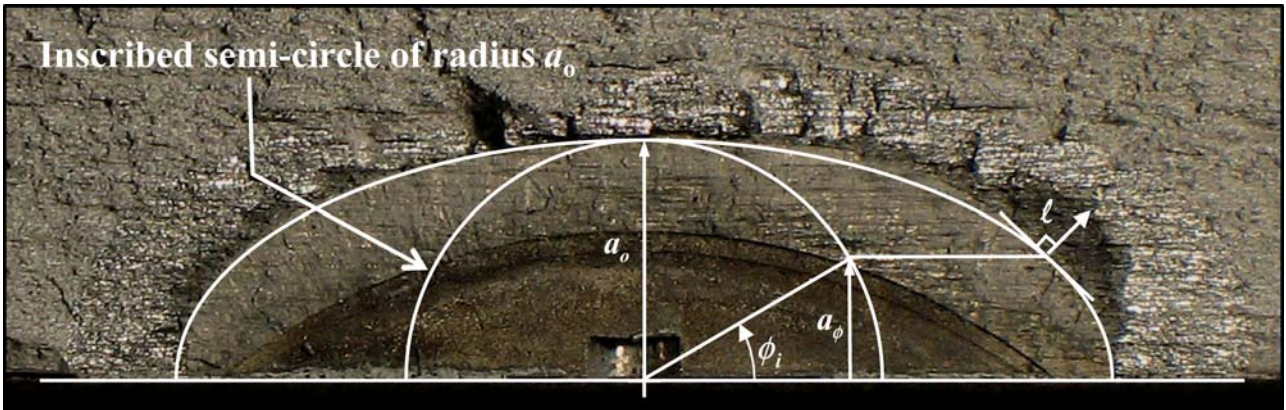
Determination of ϕ_i from Specimen Fracture Surface..
